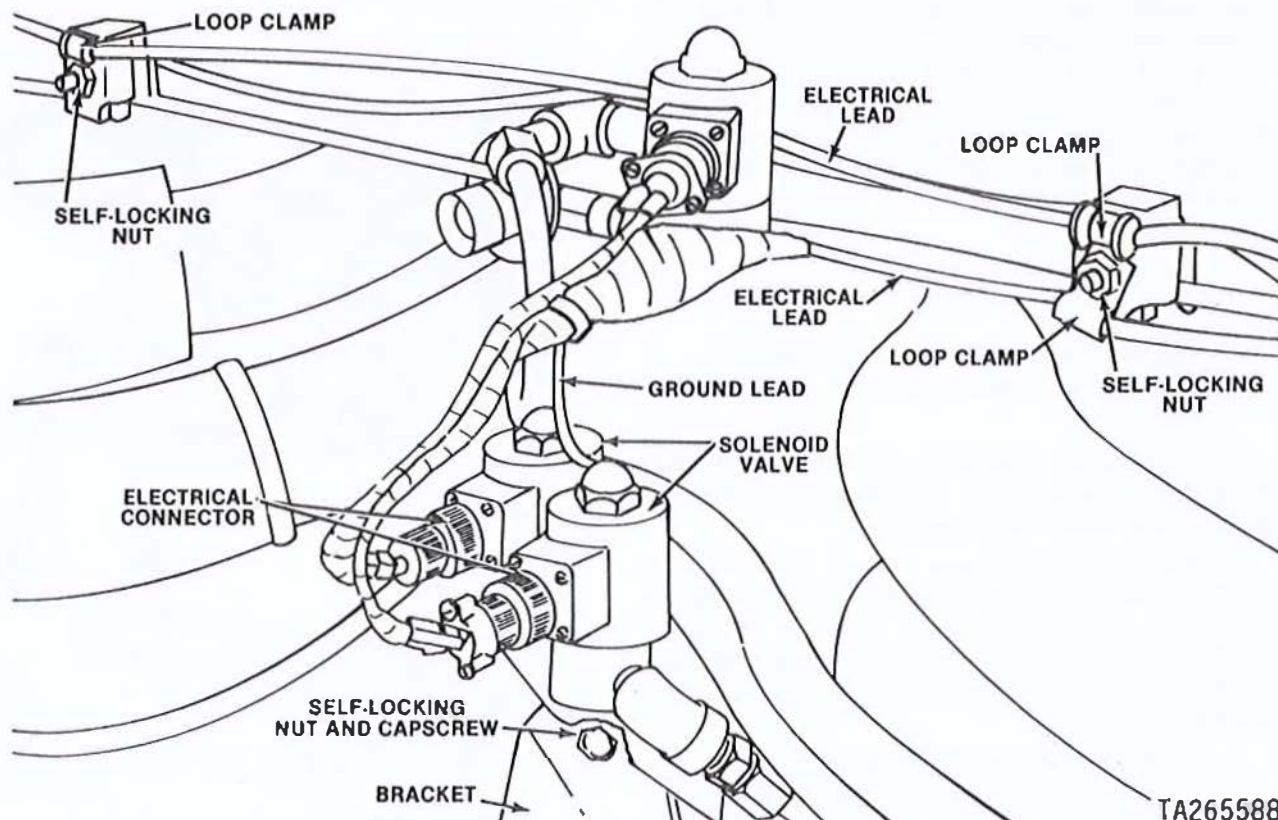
Removing or Installing Smoke and Dust Detector Electrical Cable
